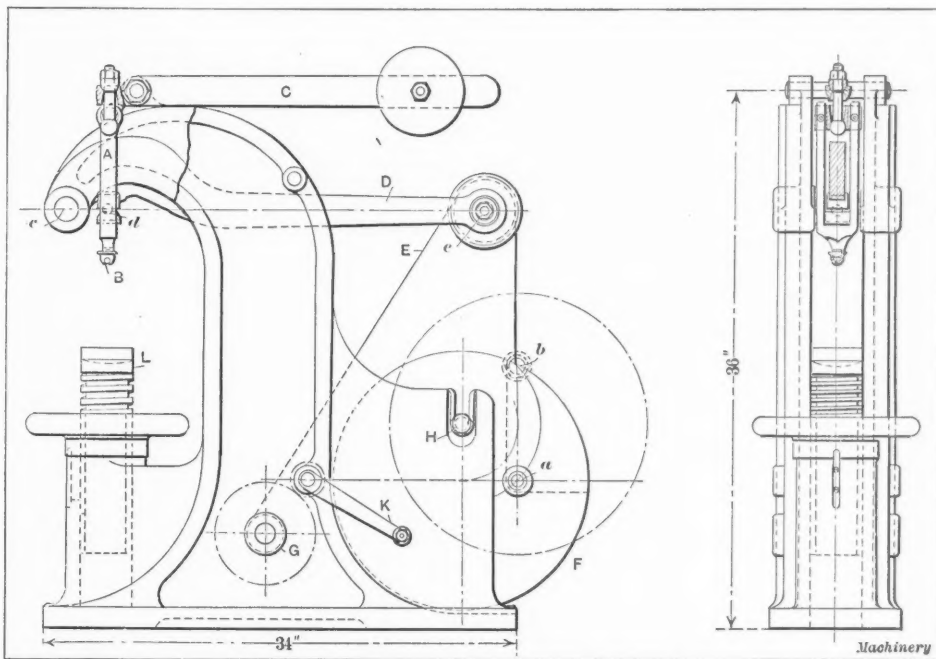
Side and Front Elevations of Hardness Testing Machine
